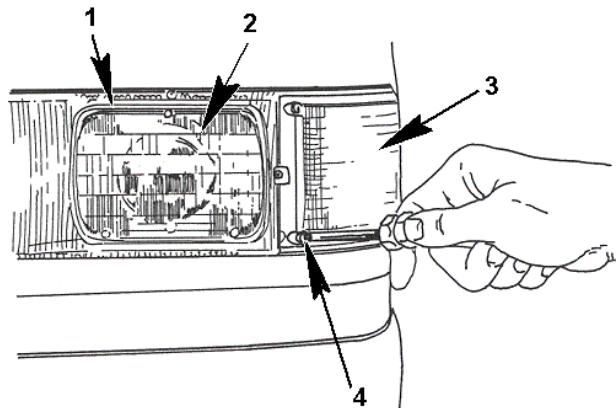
G47005227.TIF Removing Headlight Bezel
